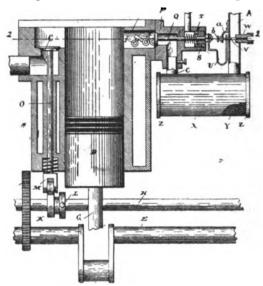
SECTIONAL VIEW OF WINTON MOTOR.
